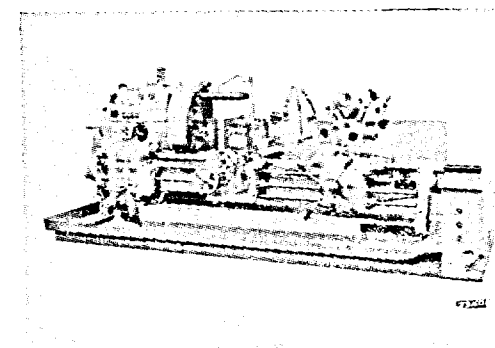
Herbert No. 8 Preoptive Combination Turret Lathe for chuck work up to 20" swing. Fitted with independent feed shafts to saddle and turret slide.
